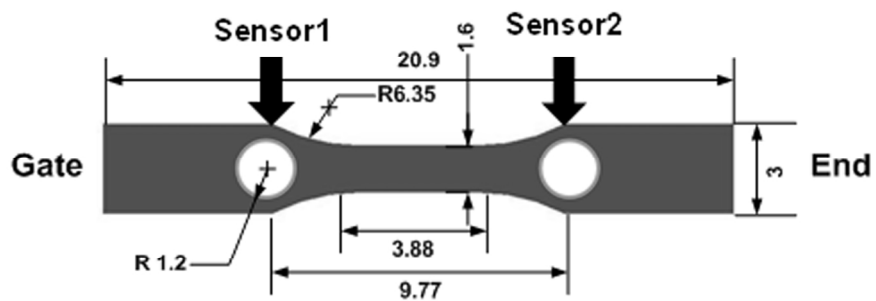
Mold and part: (d) dimensions of molded part (all in mm).
